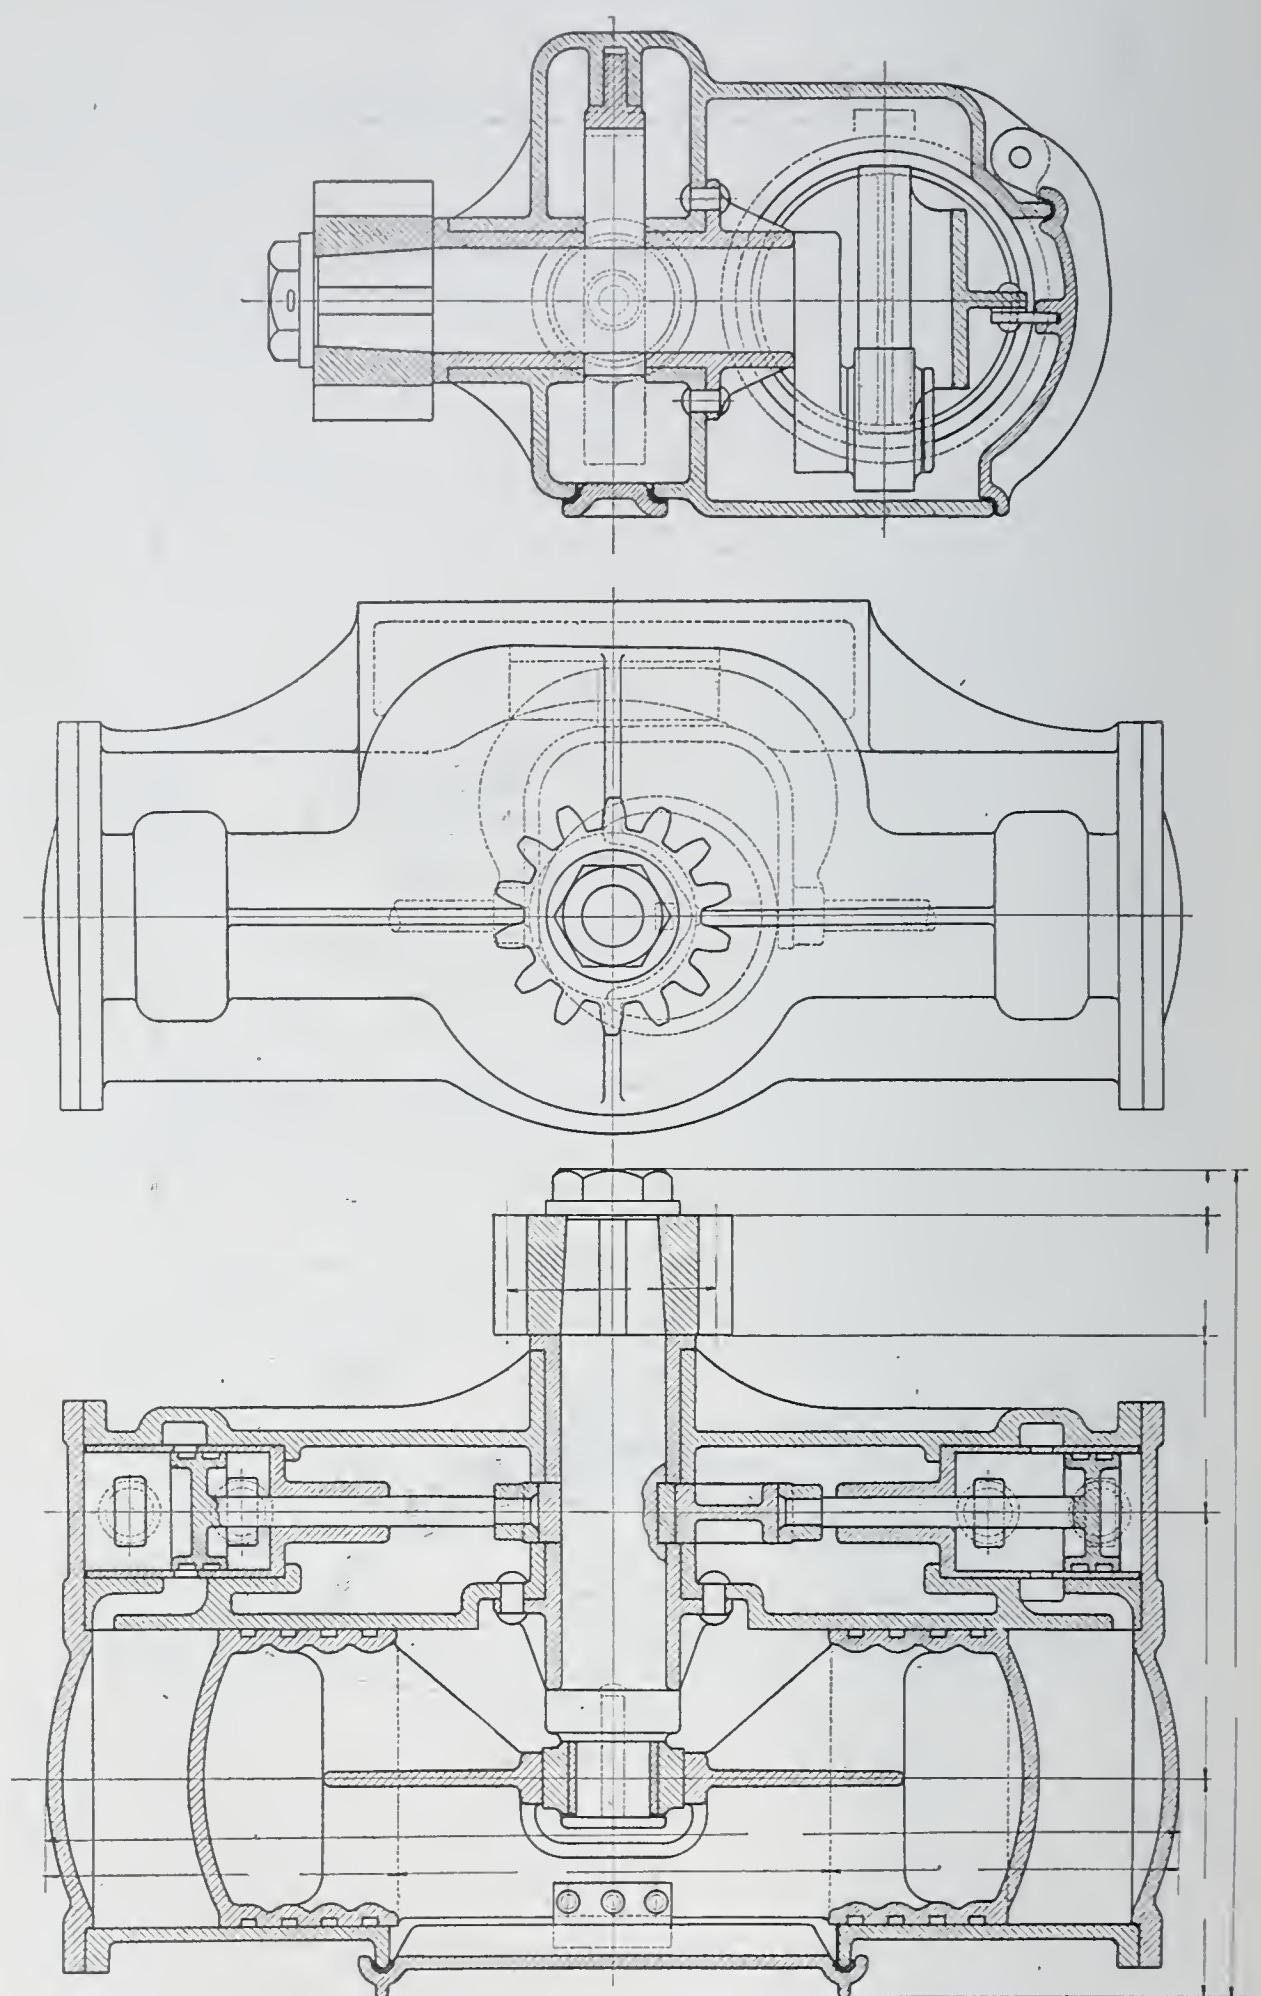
Preliminary Design for Gaso-Pneumatic Truck, Air Motor,
